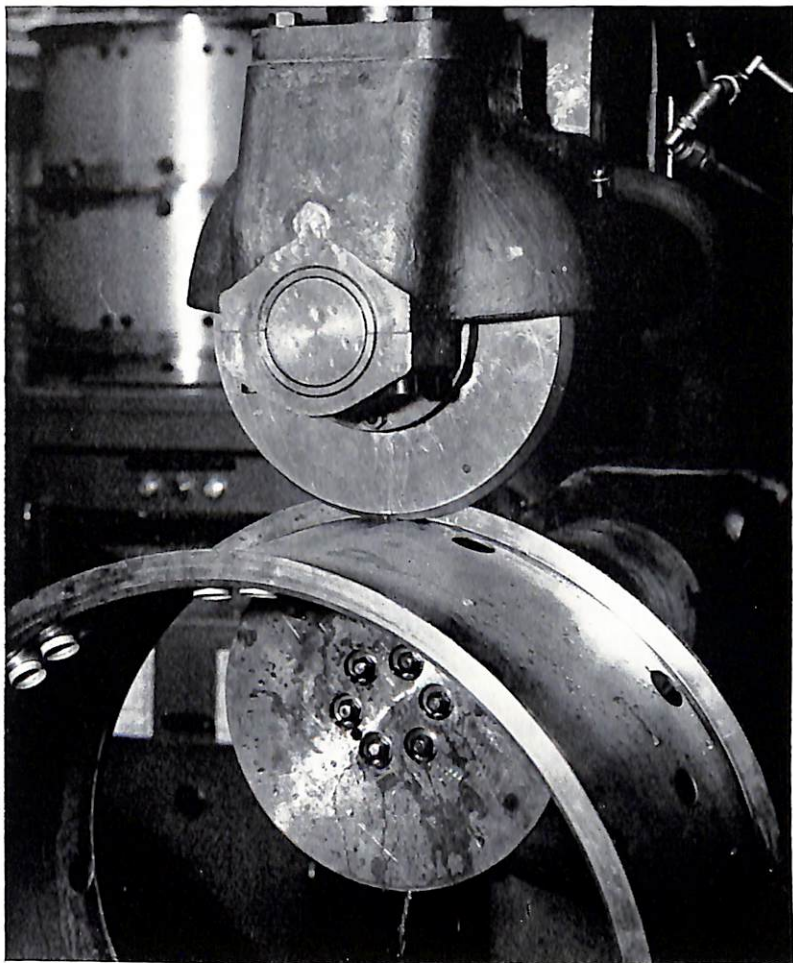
Seam welding electrodes of heat-treated chromium copper in operation on an aircraft part.
